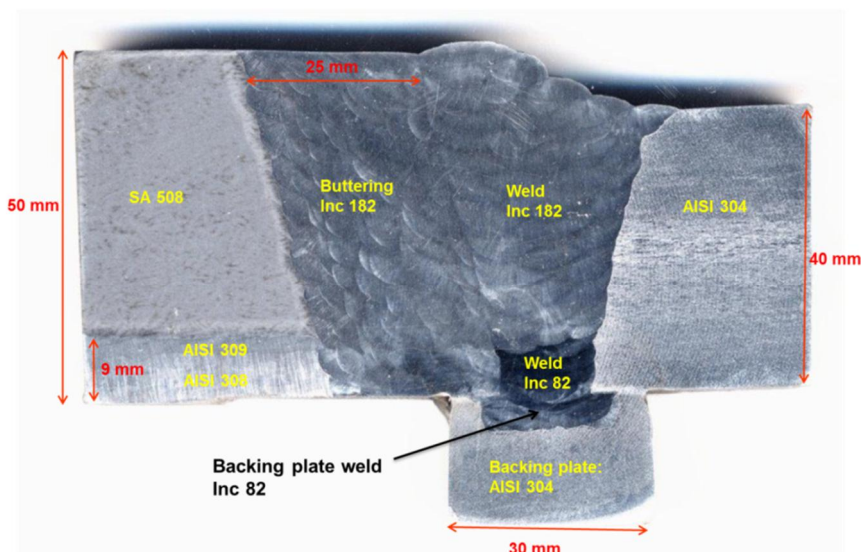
Cross-section macrograph of the finished BWR type DMW weld [1].
